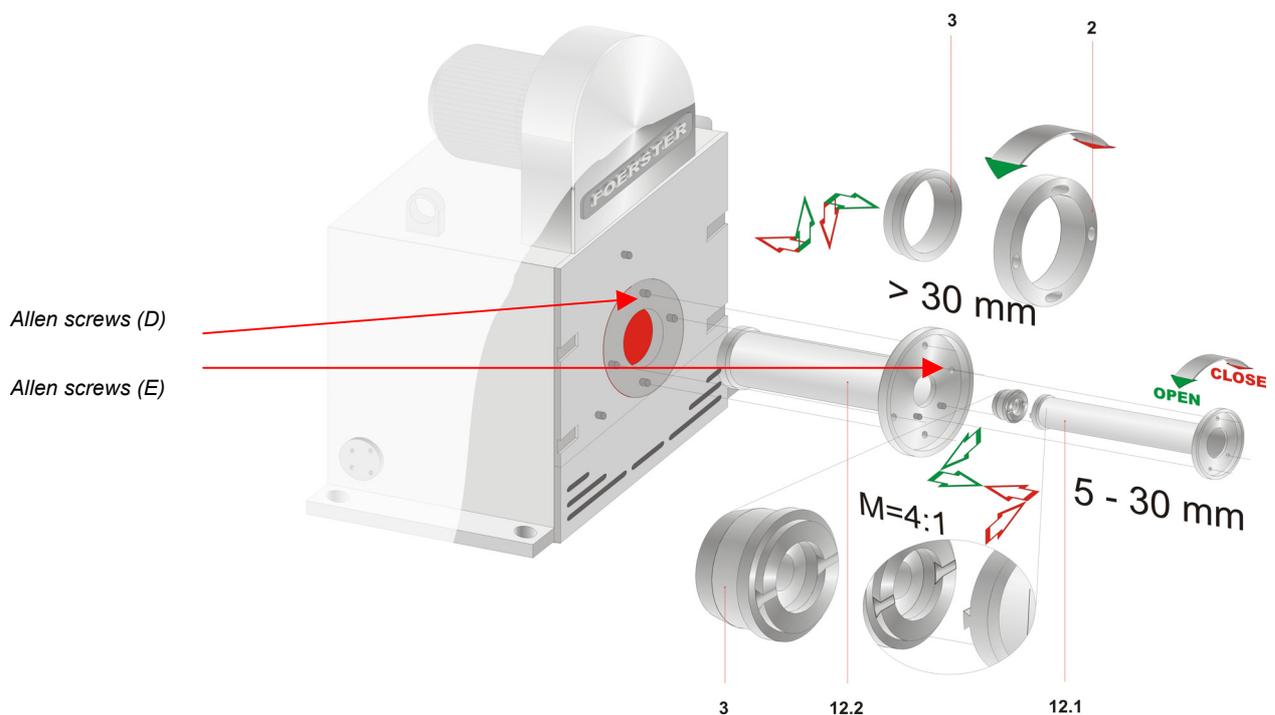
Fitting nozzles exit side, legend see Chapter 2.7
